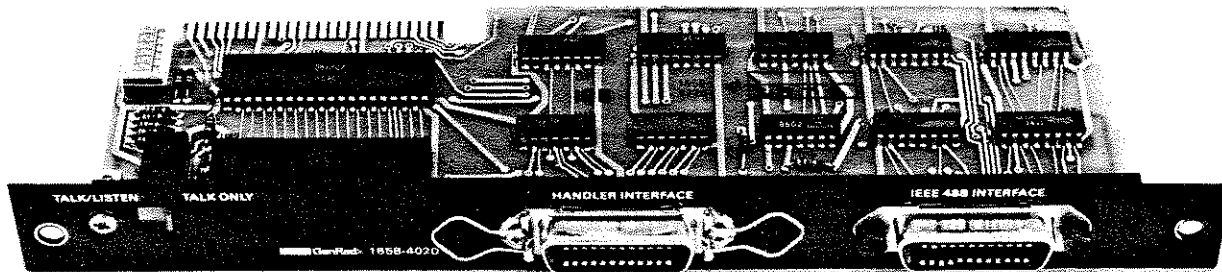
IEEE/handler interface option assembly 1658-9610, including the interface option board (IOB) 1658-4720.
